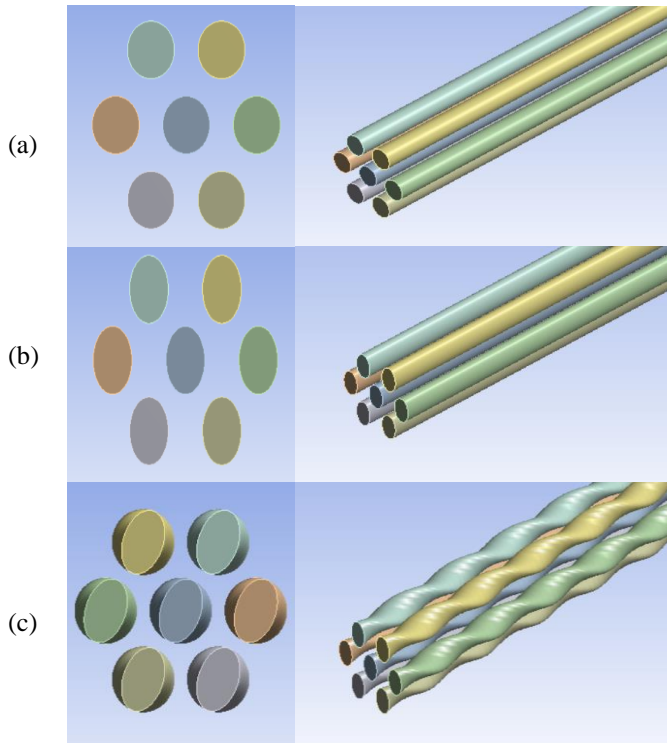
Front and isometric View of the (a) Round-Shaped, (b) Oval-Shaped, and (c) Twisted Tube.
